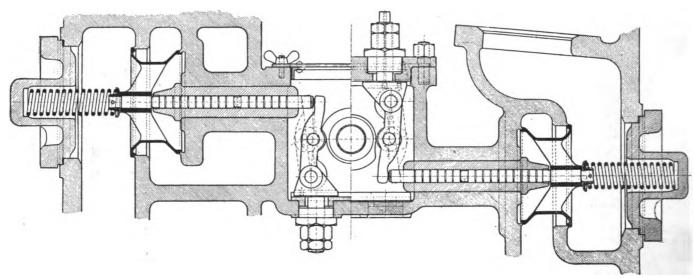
Poppet Valve Gear with Intermediate Lever Located Between the Cam and the Poppet Spindle
